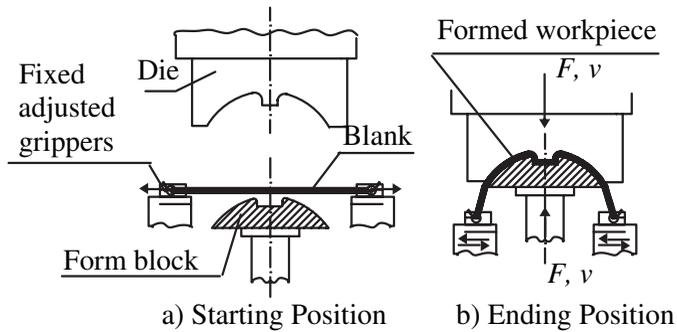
Stretch Draw Forming: a) Starting Position; b) Final Position.
